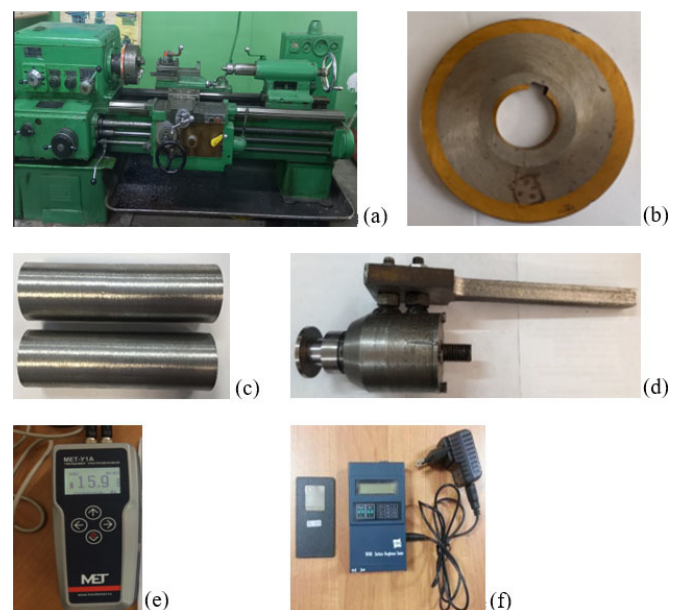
Technological equipment used in experimental research: (a) screw-cutting lathe, (b) cup cutter made of R6M5, (c) workpiece made of steel 45, (d) special rotary tool, (e) MET-U1 device for measuring hardness, and (f) TR 100 profilometer for measuring roughness.
